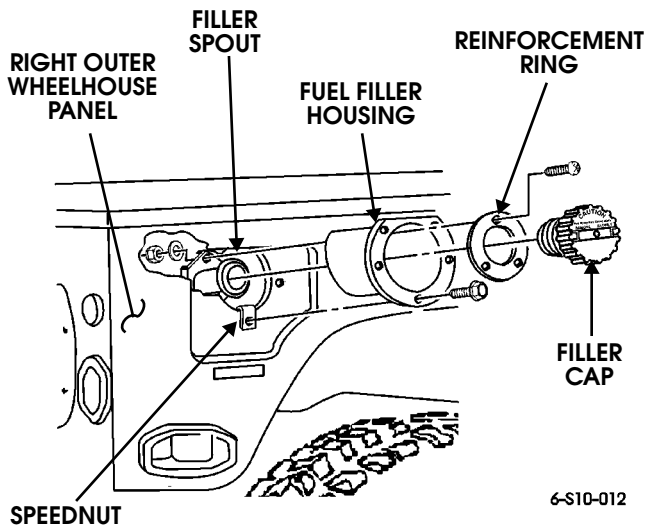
Fuel Filler Housing Auxiliary Fuel Tank
